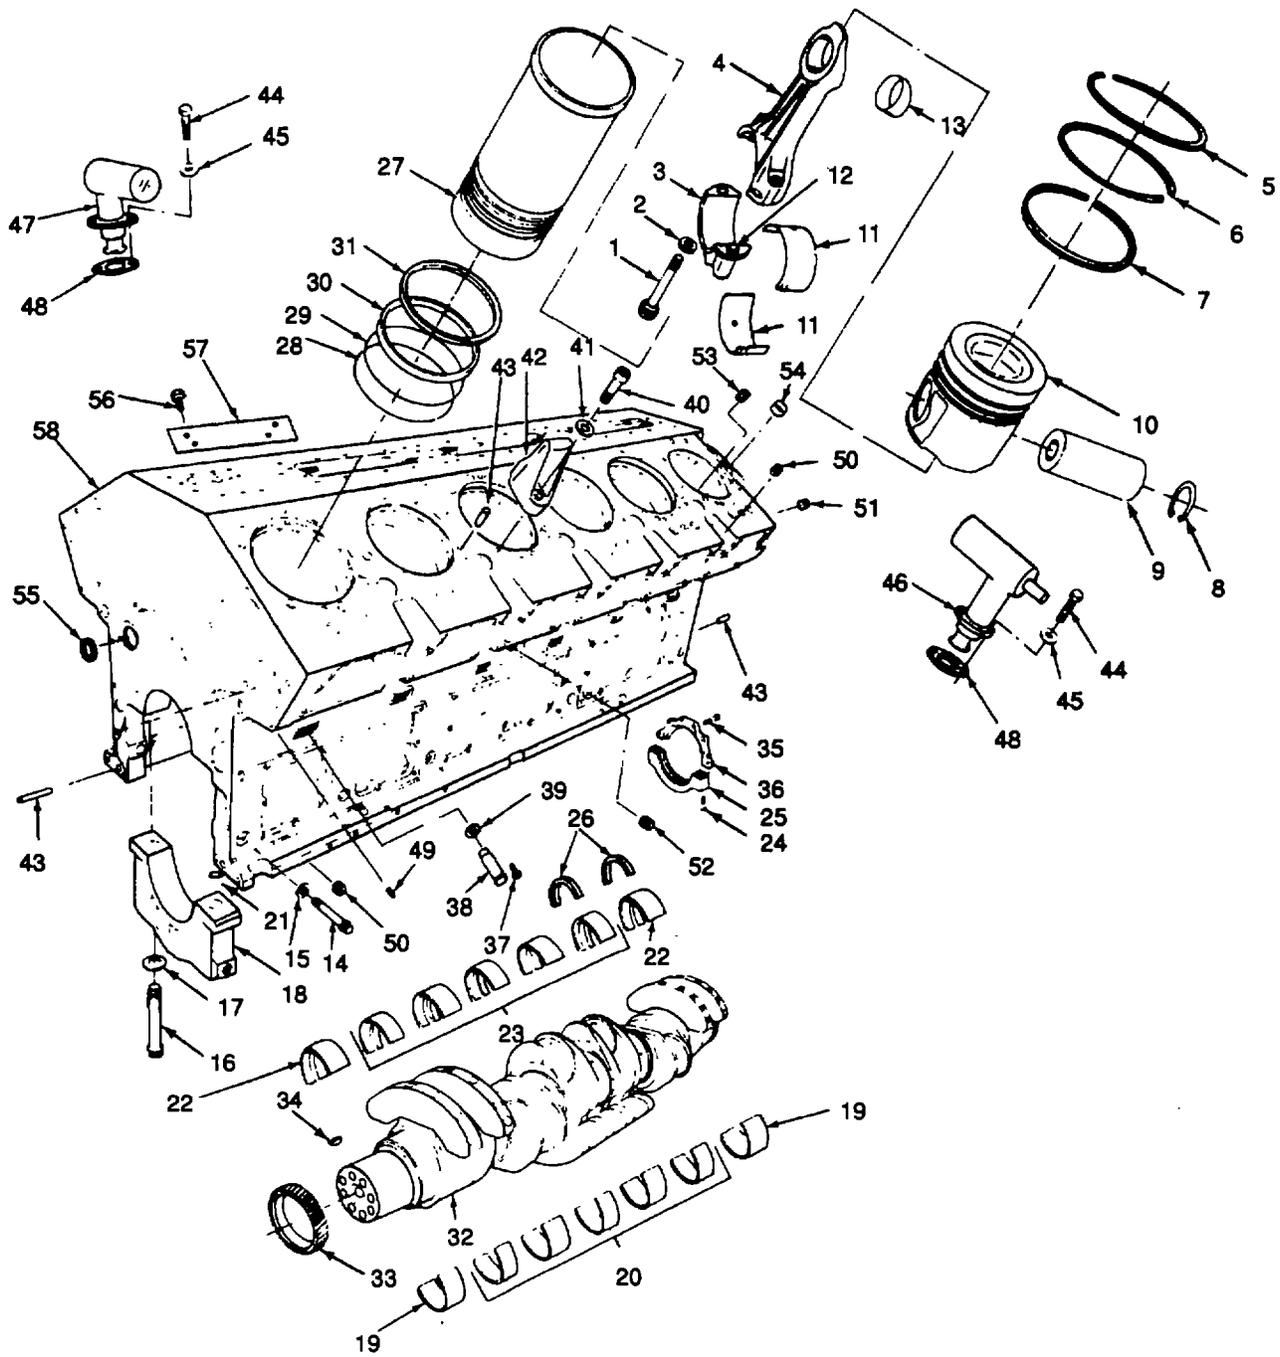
Cylinder Block and Related Parts (Sheet 1 of 2)
